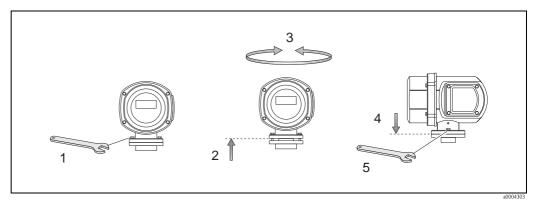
Turning the transmitter housing (stainless steel field housing)
